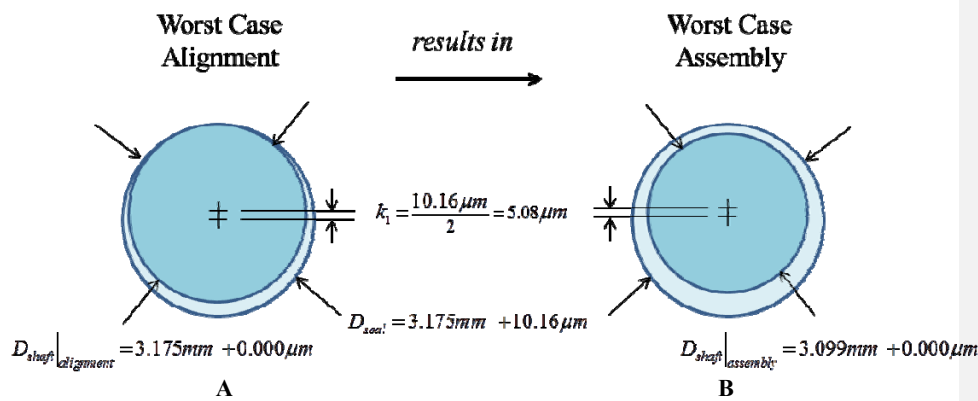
Shaft to seal alignment and final assembly process demonstrations; A – alignment pin used to center shaft and seal assembly; B – final assembled position of shaft and seal
